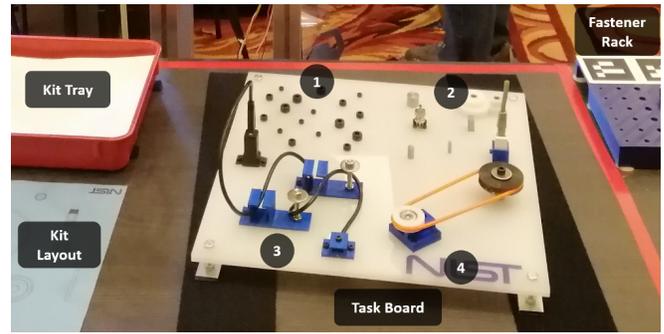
The task board incorporates four task classes: 1. Fastener Threading, 2. Insertions, 3. Wire Routing, and 4. Belt Threading and Tensioning. During disassembly, removed components are placed into the kit tray. For assembly, the fasteners are initially arranged in the fastener rack, while the rest of the components lie on the kit layout.
